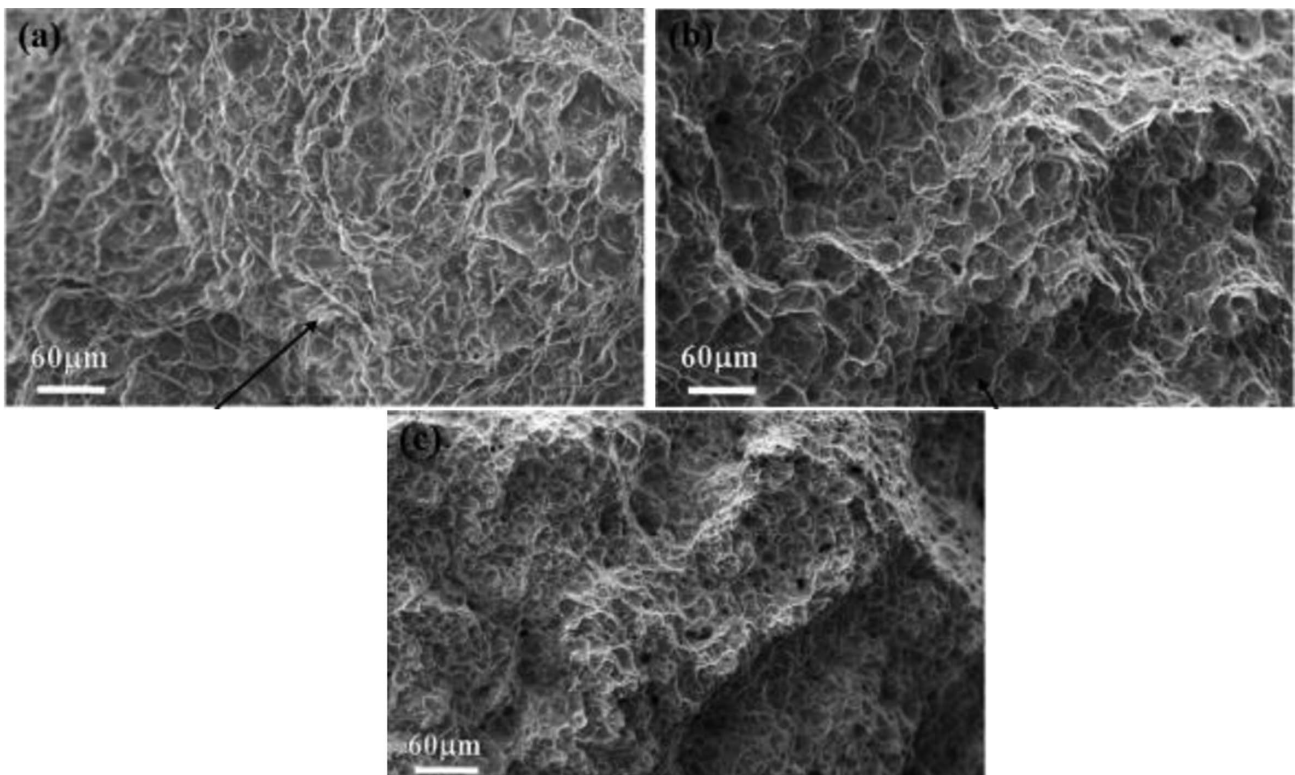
Zirconium tensile samples fracture surfaces at: (a) 100°C, (b) 150°C and (c) 200°C
